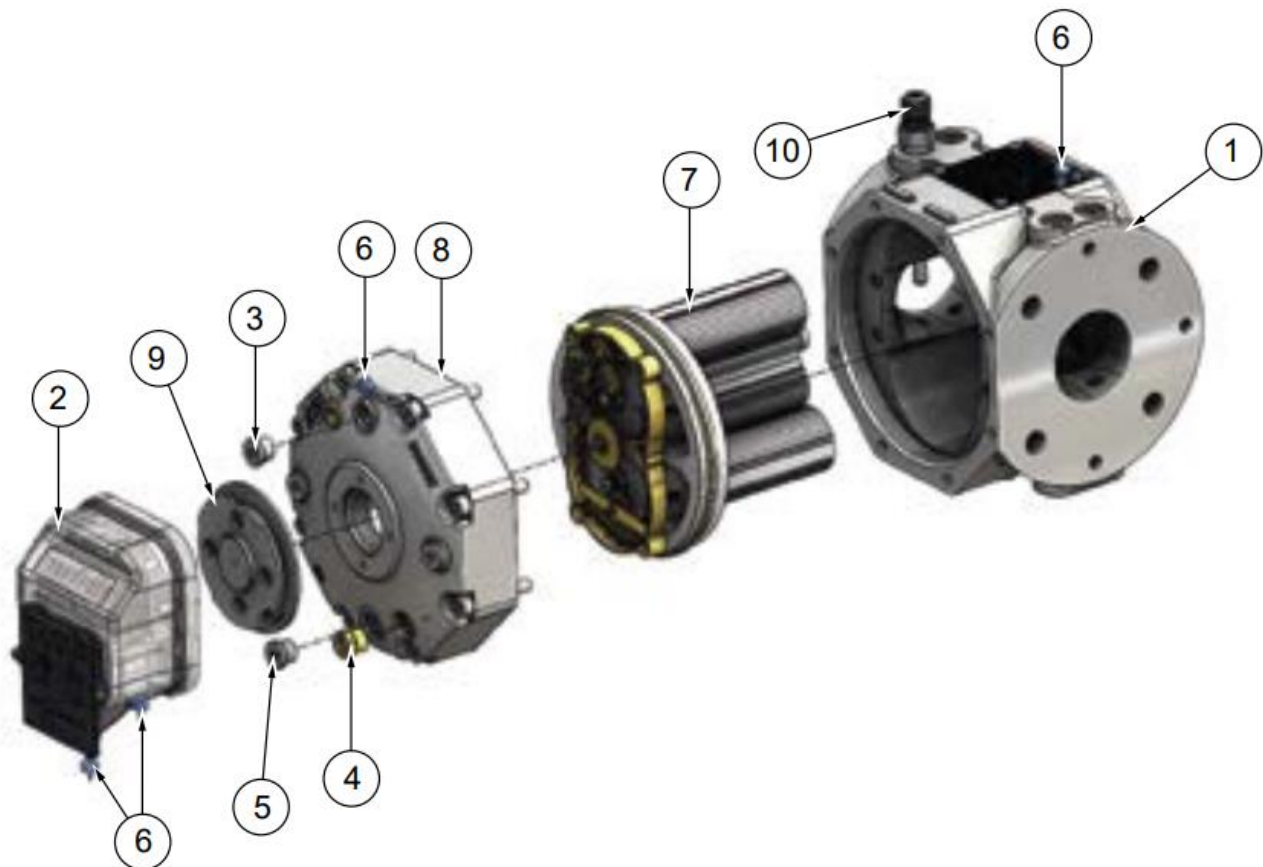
3D Exploded drawing of the IM-RM rotary piston meter produced by Pietro Fiorentini for NG or H2NG mixtures up to 20%vol. (1) Body; (2) Totaliser group; (3) Oil filler cap; (4) Oil level sight glass; (5) Oil drain plug; (6) Metrological seals; (7) Measuring cartridge; (8) Cover; (9) Magnetic coupling; (10) Thermowell. Image from Pietro Fiorentini (2023) [32].
